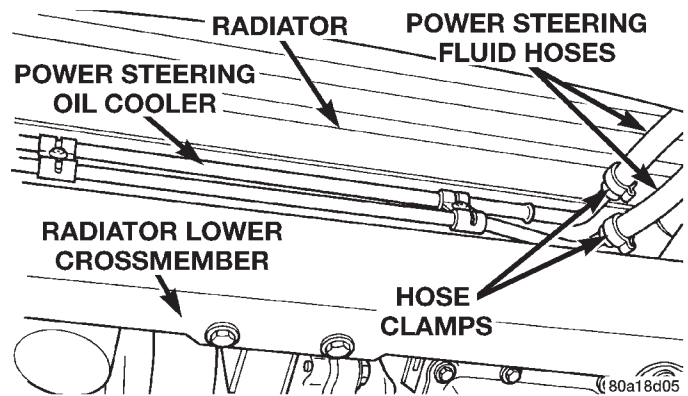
Hose Clamps At Power Steering Fluid Cooler
